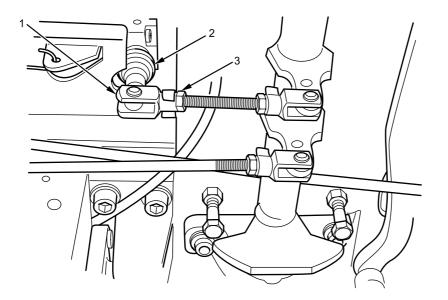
Air Valve Linkage Centered on Latch Handle Shaft.
